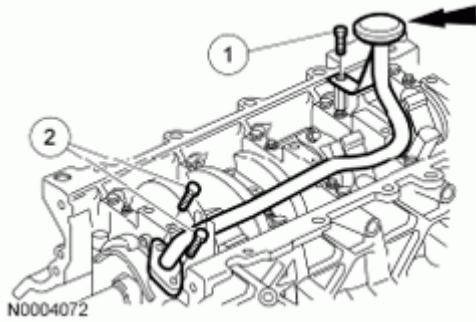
Identifying Oil Pump Screen And Pickup Tube-To-Oil Pump Bolts
